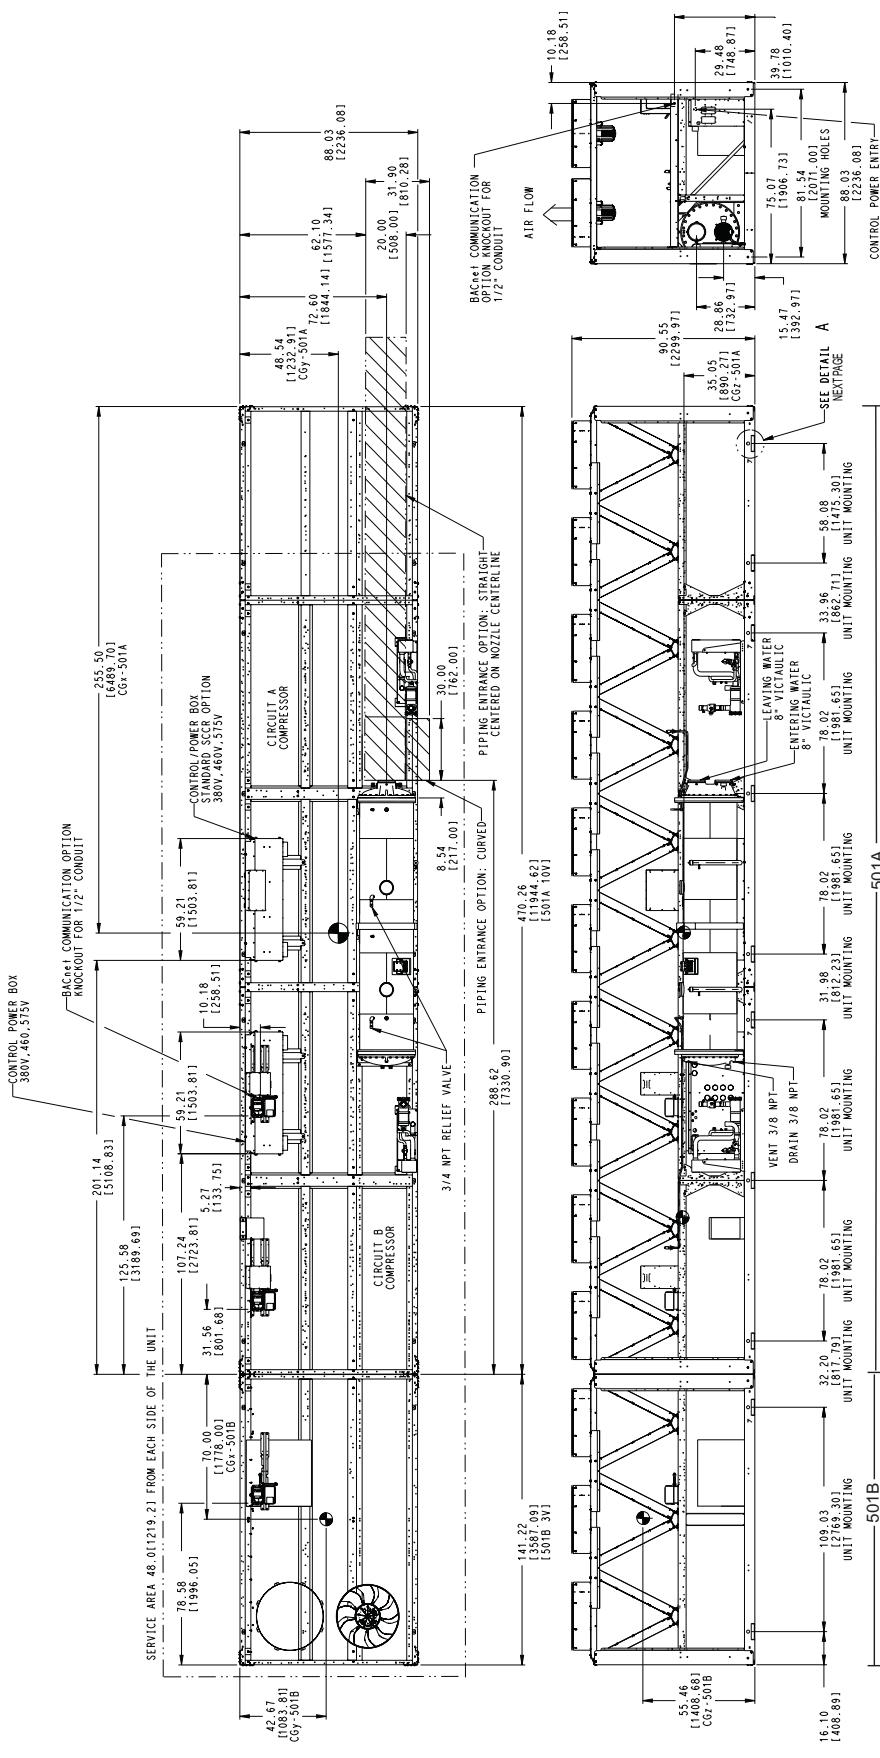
30XA501 (501A and 501B Modules) Air-Cooled Liquid Chiller Dimensions
